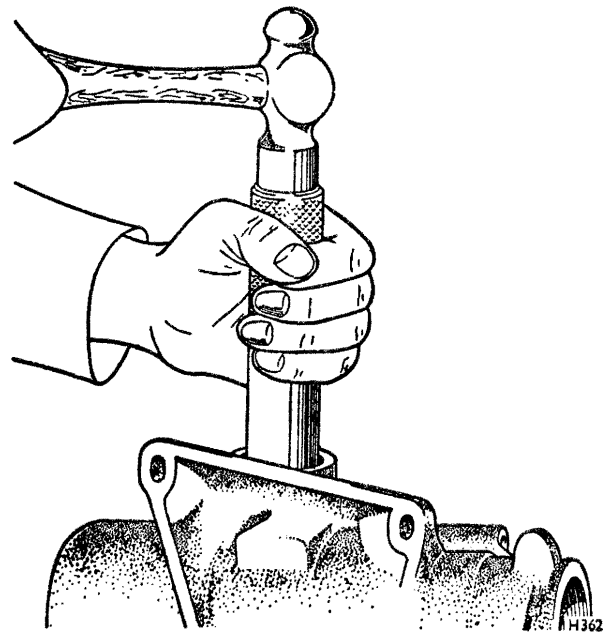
REMOVING AND INSTALLING ROCKER SHAFT BEARING
